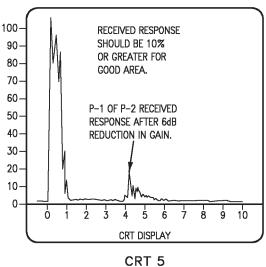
Setup for Inspection of Honeycomb Core Sandwich Assemblies (Sheet 2)
